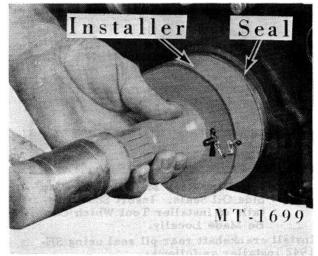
Installing Crankshaft Rear Oil Seal Using SE-1942 Installer
